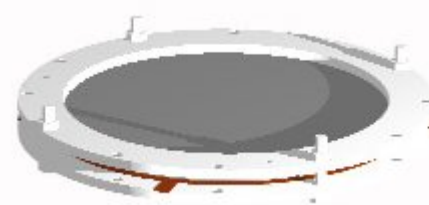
Assembly of MCP-stack - Stage 3-2 (DLD40, DLD80 & HEX80)
